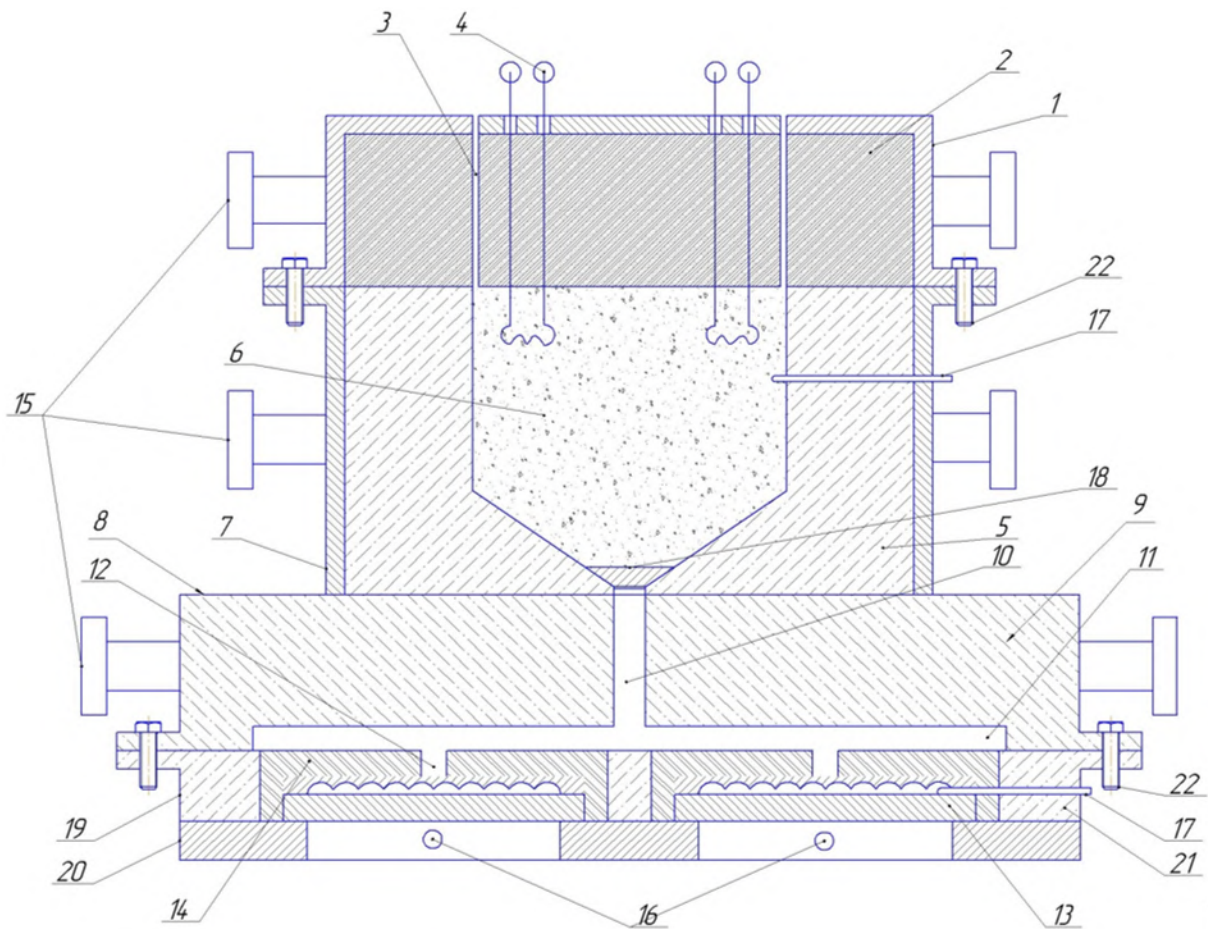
Injection mould assembly: 1 – frame of the top of the reaction mould, 2, 5 – sand-graphite moulding mixture, 3 – vapours, 4 – tungsten spiral, 6 – thermite charge, 7 – frame of the bottom of the reaction mould, 8 – frame of the top of the injection mould, 9 – moulding mixture of the frame of the top, 10 – standpipe, 11 – slag trap, 12 – feeders, 13 – casting base, 14 – rod, 15 – trunnions for transportation, 16 – gas burners, 17 – thermocouple, 18 – aluminium stopper, 19 – frame of the bottom of the mould, 20 – heating plate, 21 – moulding mixture of the frame of the bottom, 22 – centring and guide pins.
